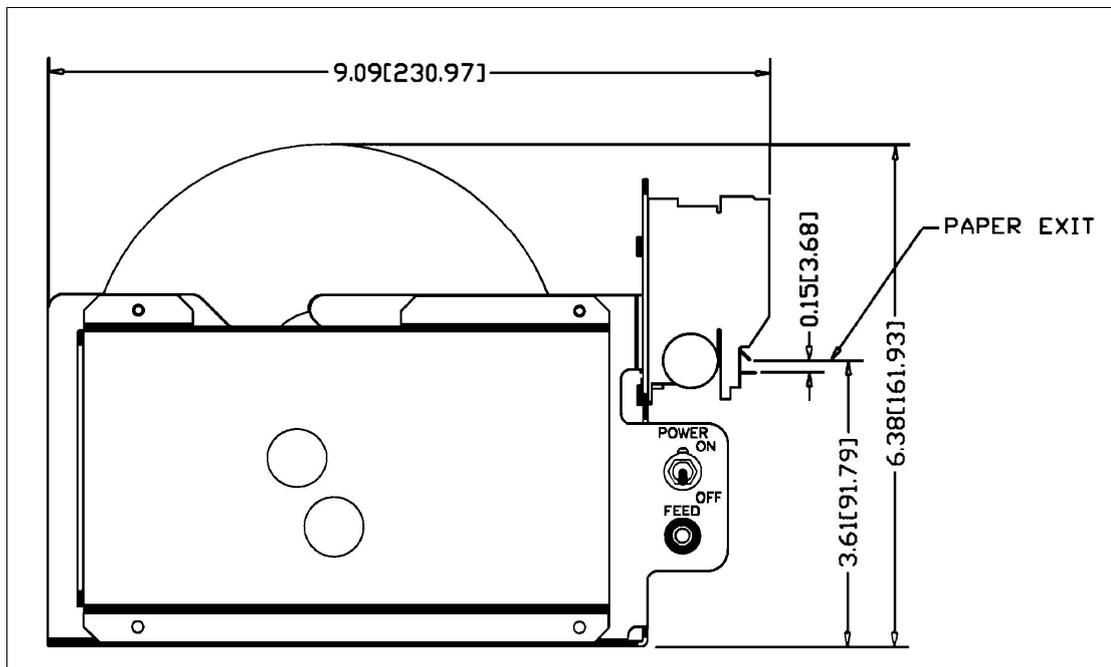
MTP-630/MTP-640 Dimensional Drawing
